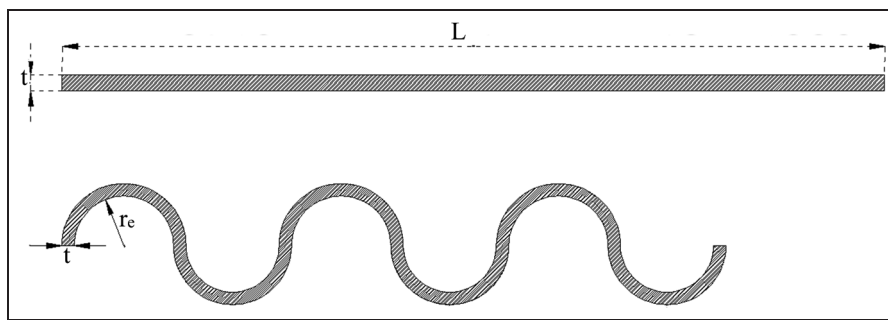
Two slabs showing the longitudinal cross-sections of the simple tube and the corrugated specimen.
